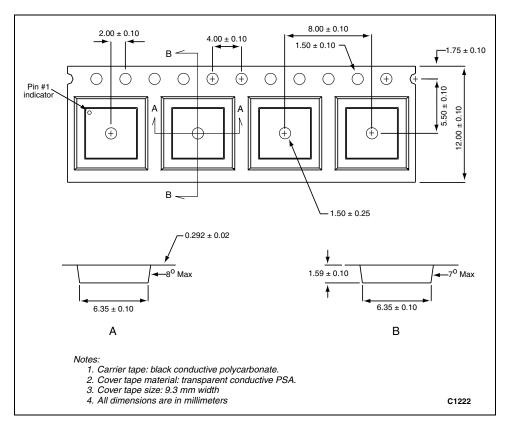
CX65102 6-Pin LCC Tape and Reel Dimensions
